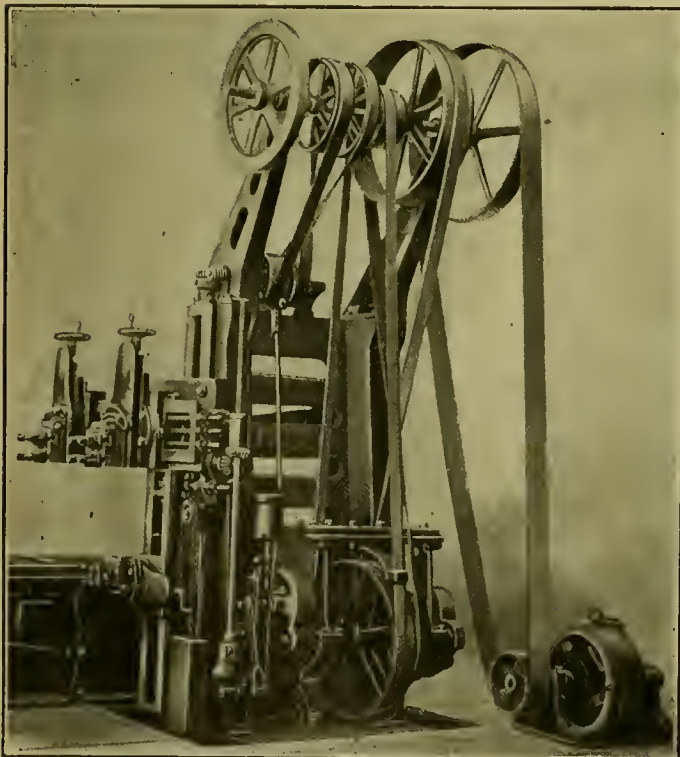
VIEW OF THE BELTED INDIVIDUAL DRIVE USED UPON LARGE SIZES OF THE OPEN-SIDE PLANERS, BUILT BY THE DETRICK & HARVEY MACHINE COMPANY, SHOWING USE OF FLYWHEEL.
